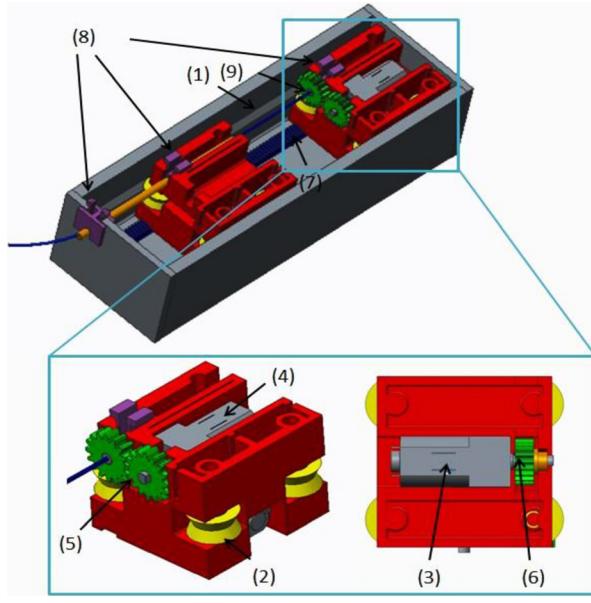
CAD drawings of the robot are shown. On the top is an isometric view of the assembled robot. On the bottom left is the isometric view of the inner tube carriage. On the bottom right is the bottom view of the inner tube carriage.
